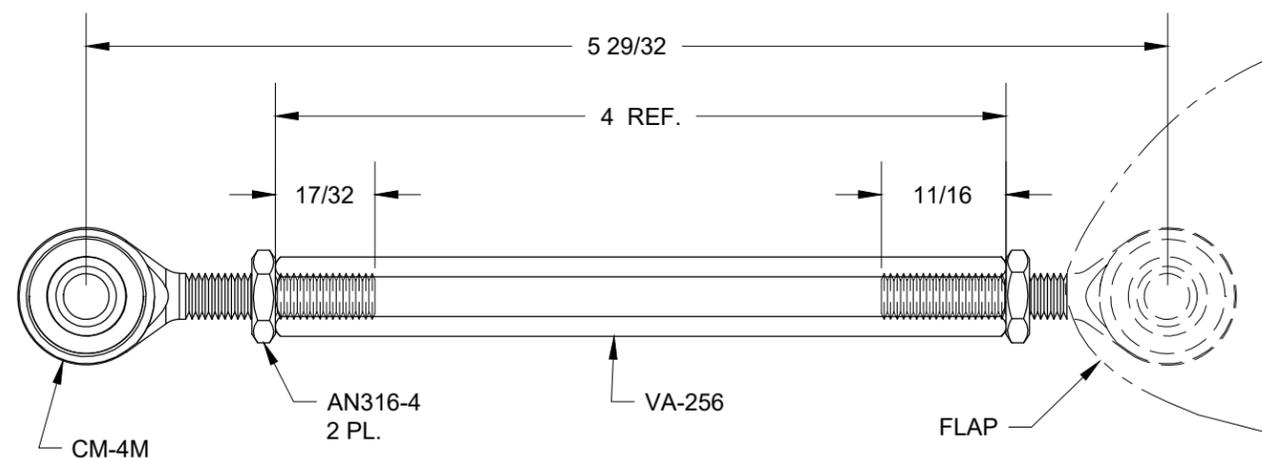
THEORETICAL FLAP PUSHROD ASSEMBLY LENGTH
